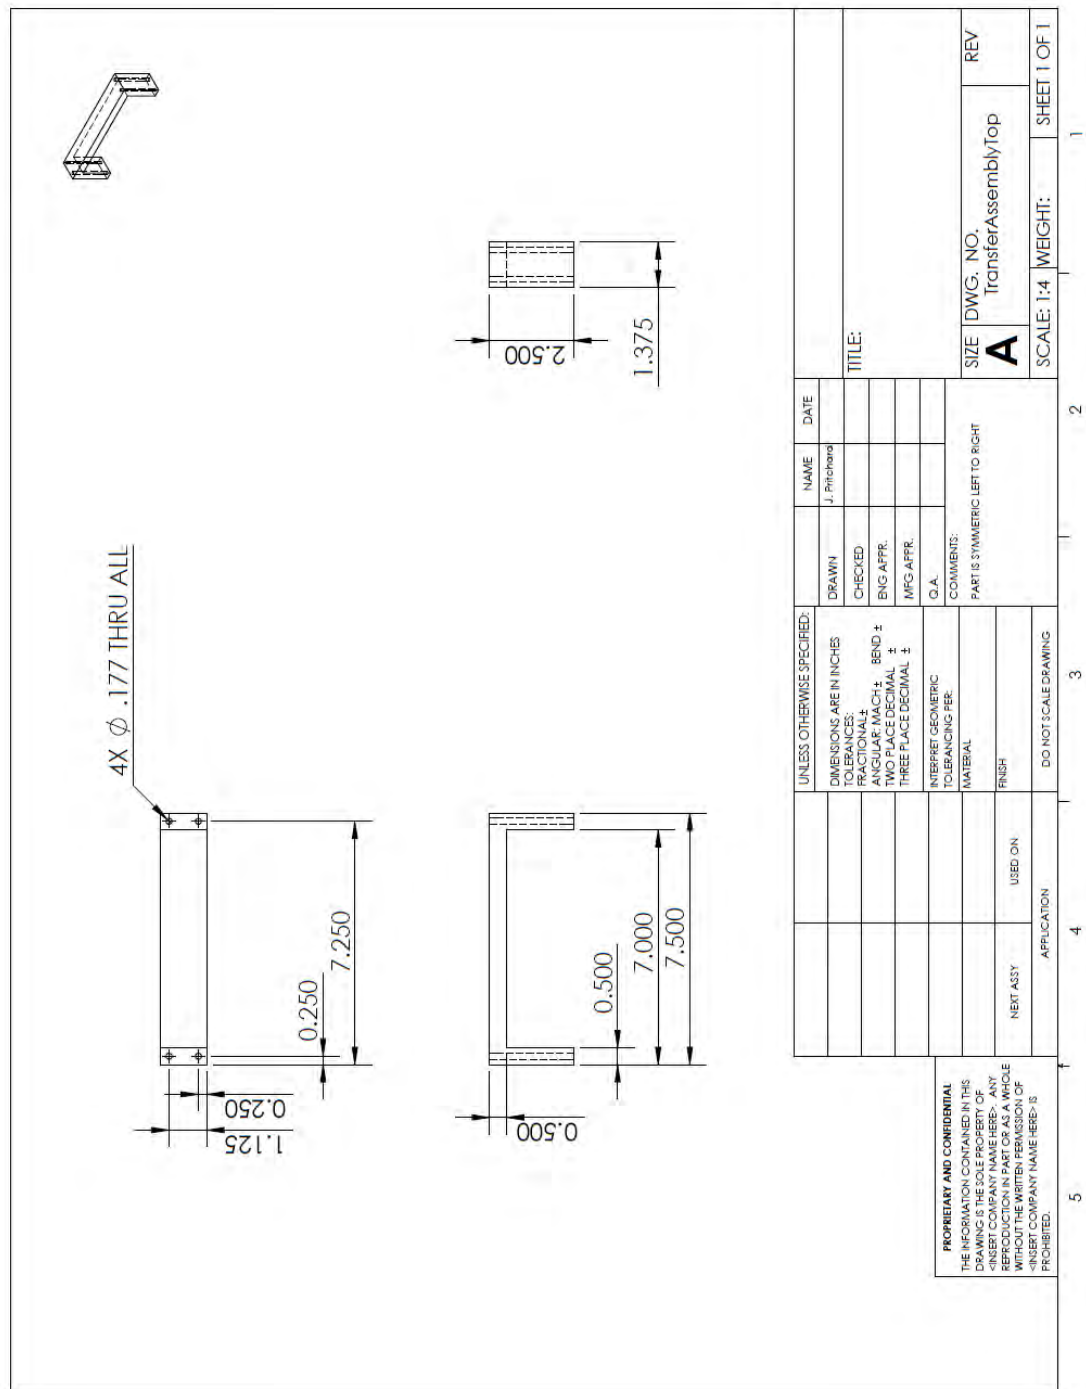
Dimensional drawing of coupon size transfer assembly backbone.
